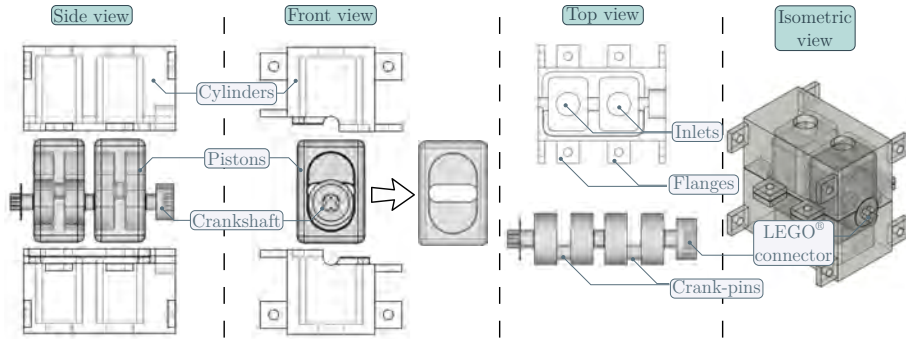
Exploded and isometric views of the PneuAct-II motor designed in Free, Libre, and Open Source Software (FLOSS) Computer Aided Design (CAD) software FreeCAD. The motor comprises three parts printed separately, including the two identical cylinder heads and the assembly-printed combination of two pistons and the crankshaft. The shaft includes male and female standard plus-shaped (+) LEGO[®] connectors on both ends to account for the modularity of the design. The two double-sided pistons constitute four chambers working like a four-piston engine, and the Scotch Yoke mechanism converts reciprocating motion to torque.
